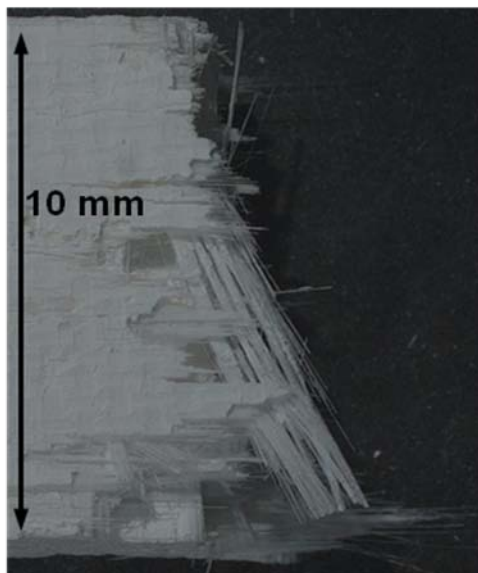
Fracture surface of the N720/AM specimen(2) tested in tension to failure with constant loading rate of 0.0025MPa at 1100°C in steam.
